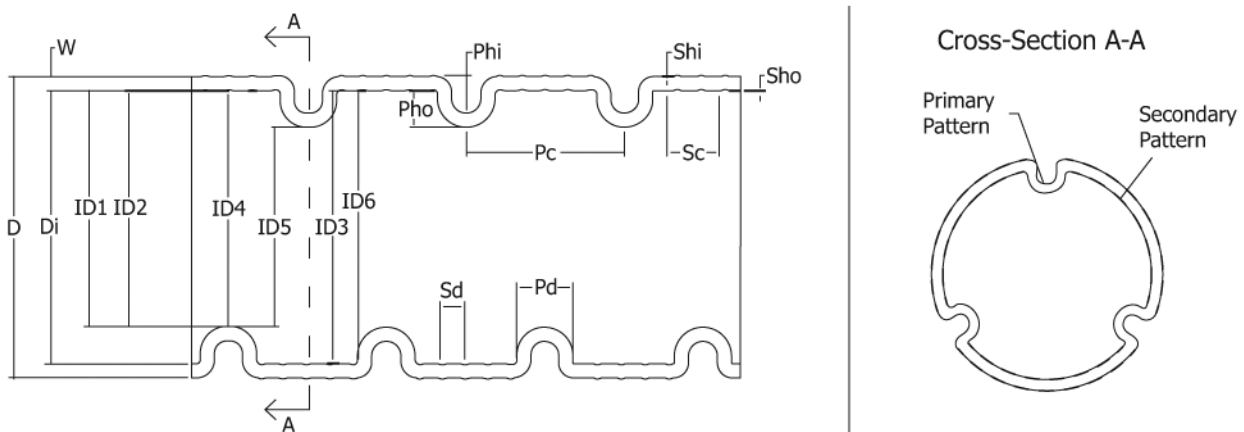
Views of Representative Textured Tube Showing Variables that Describe Possible Primary and Secondary Texturizations that May be Applied to Inside Surface of Tube, Outside Surface of Tube, or Both Inside and Outside Surfaces of Tube
